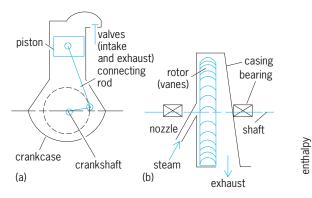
Representative prime movers. (a) Single-acting four-cycle, automotive-type internal combustion engine. (b) Single-stage, impulse-type steam turbine.
